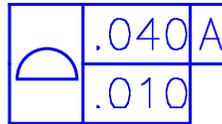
Composite profile tolerancing used only to control size, form, and orientation.
